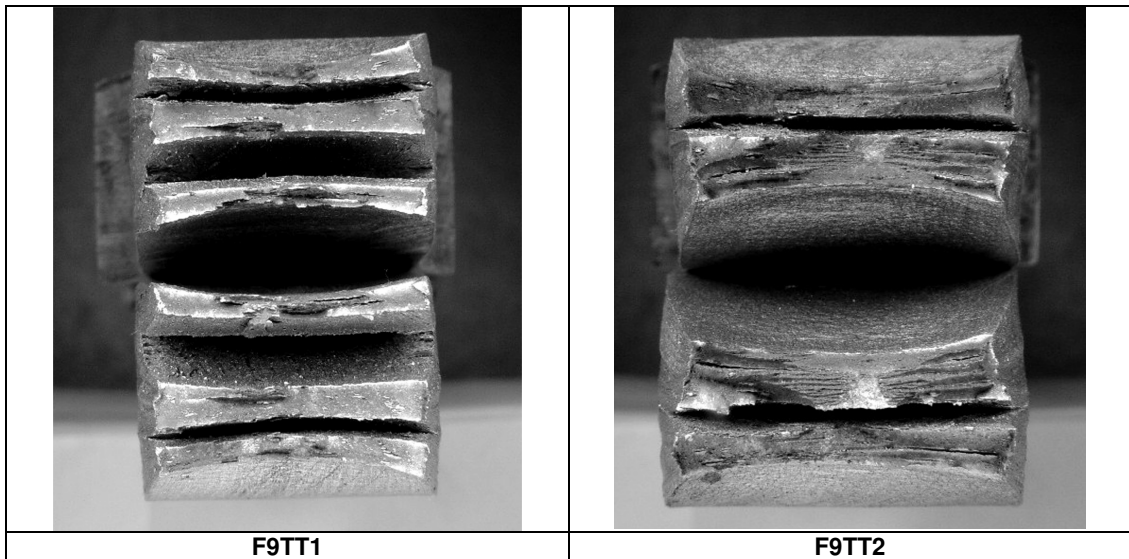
Fractographs of F9TT1 and F9TT2 specimens.
